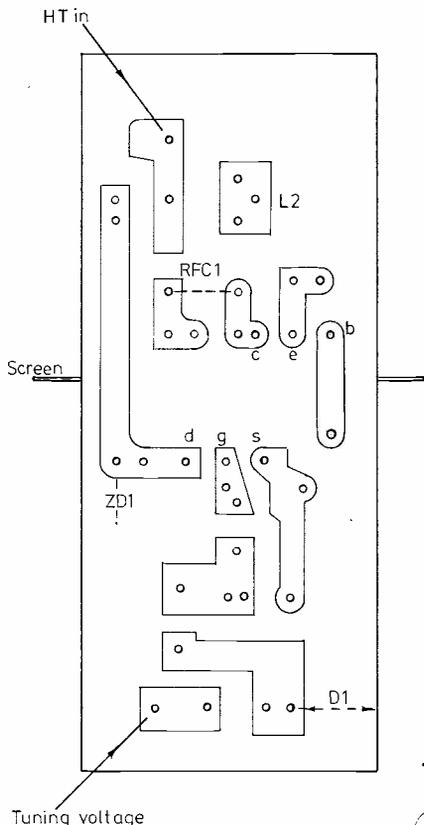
OSCILLATOR MULTIPLIER BOARD
